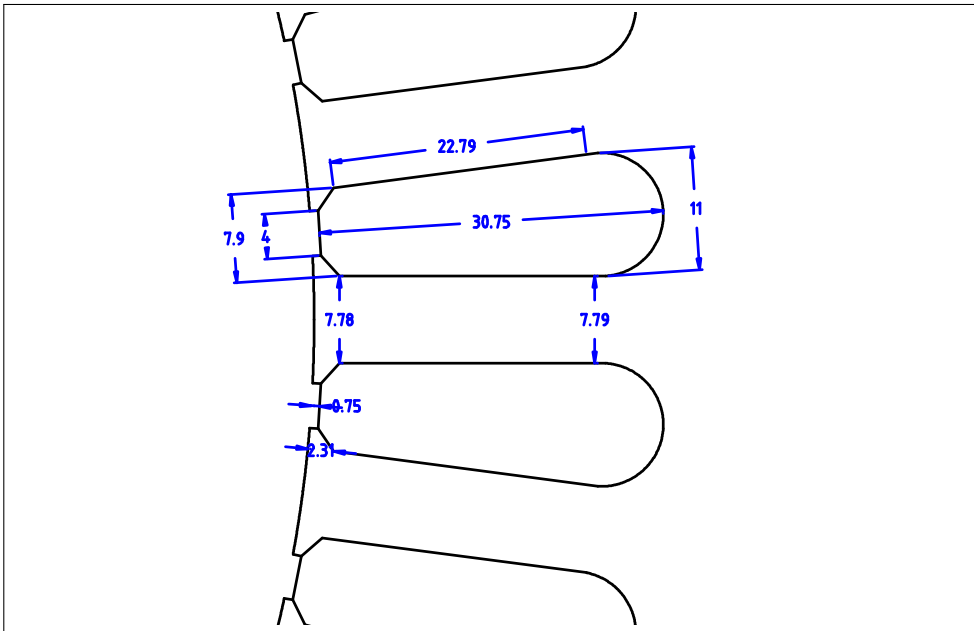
Stator slot dimensions of the 55 kW industrial induction motor
